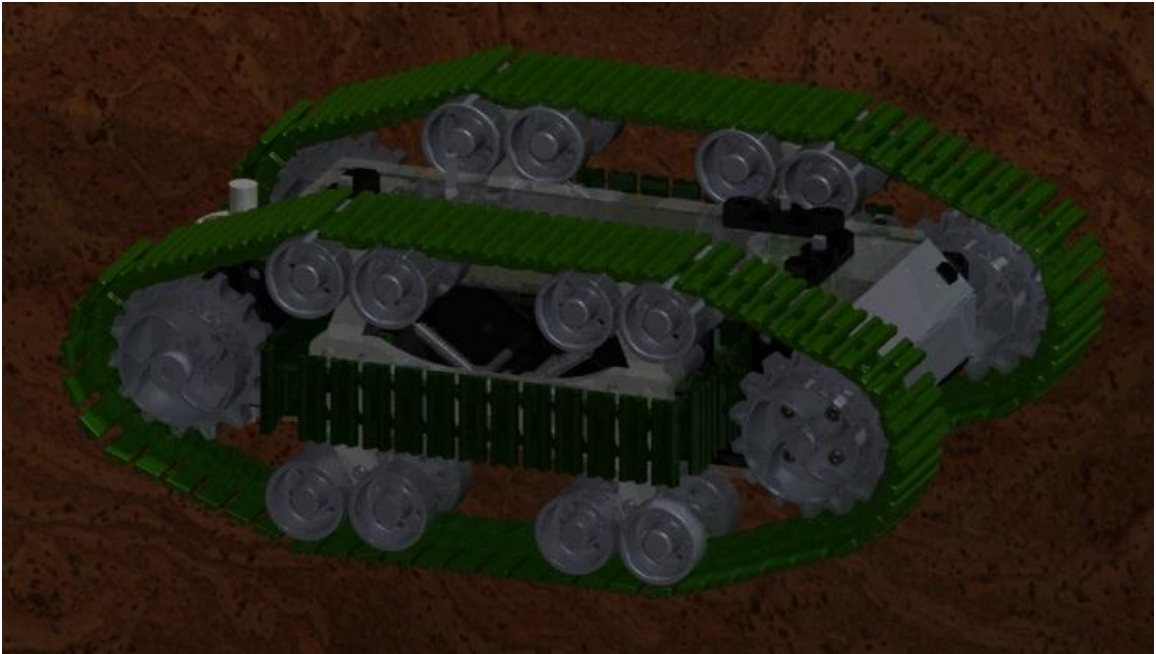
Final Burrow Robot Design (Render done in Solidworks).
